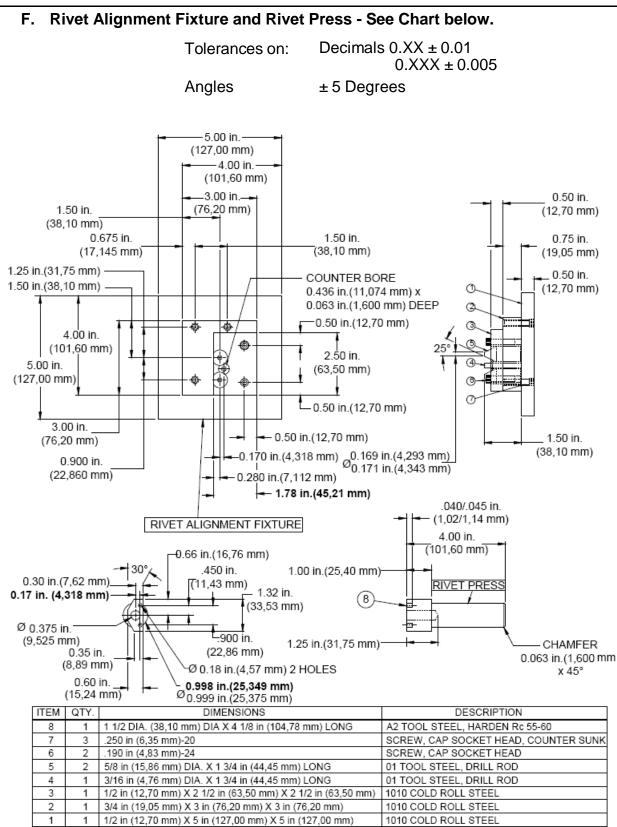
Rivet Alignment and Rivet Press Fixtures
